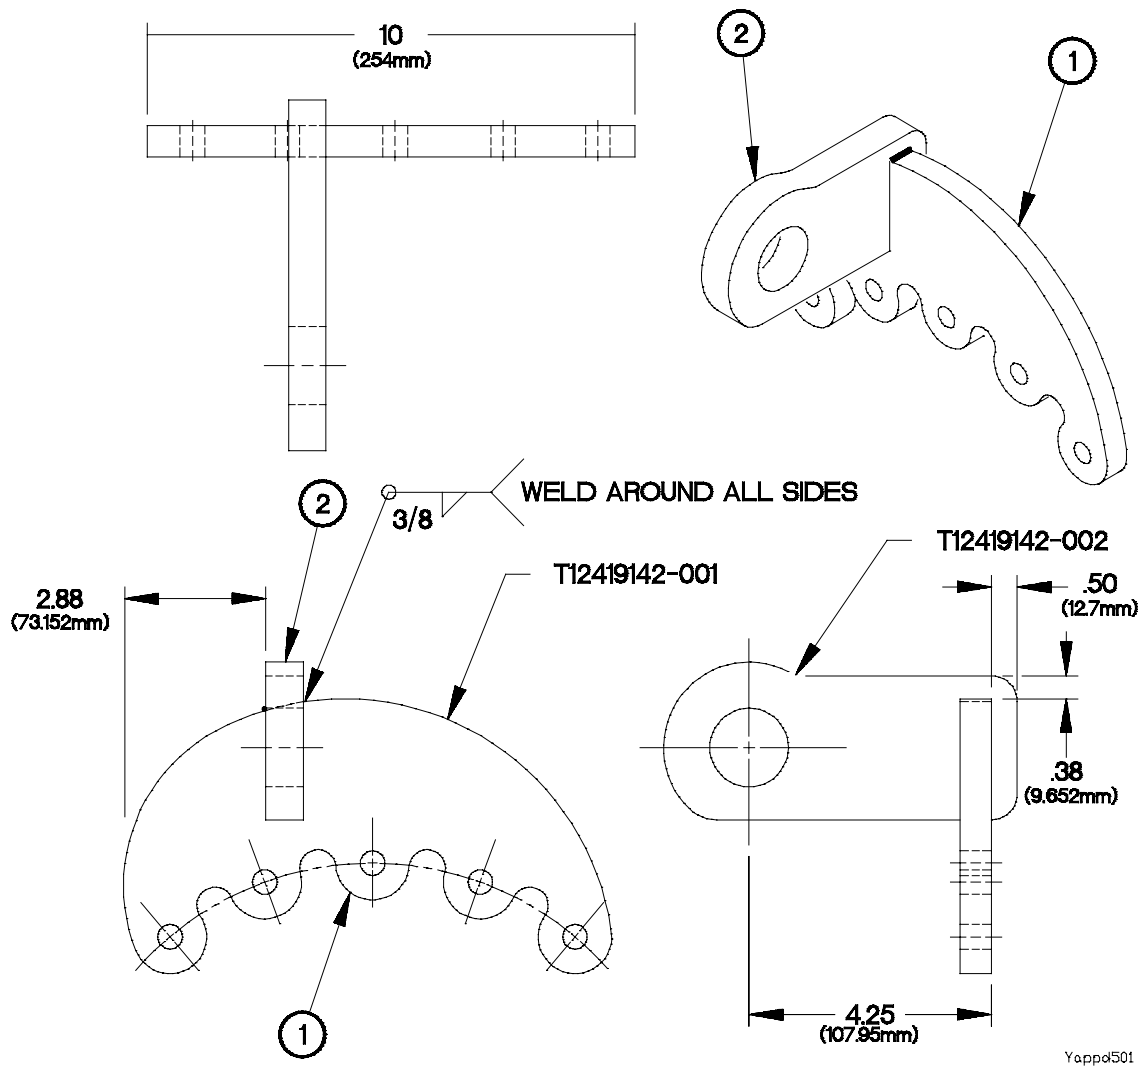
Transmission Lift and Mounting Bracket Bolt Mounting Plates
